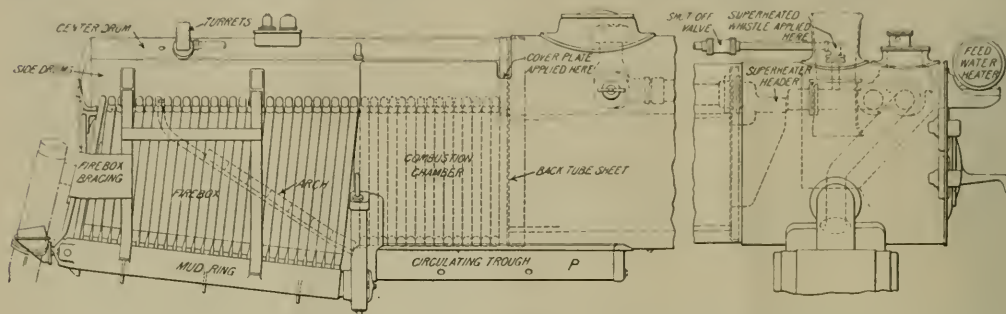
Side Elevation of McClellon Water Tube Boiler
